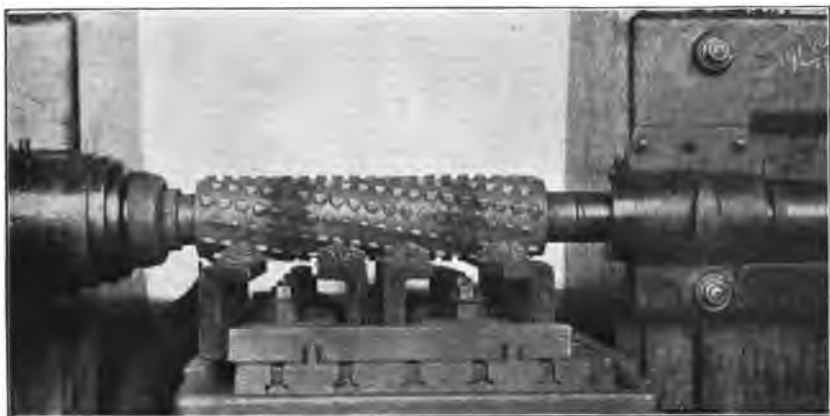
LARGE MILLING CUTTER FINISHING FOUR ROWS OF DRIVING-BOX SHOES AT ONE TIME. SUGGESTION OF MACHINE SHOP FOREMAN.
